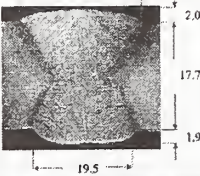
The sequence of the weld seam with the different weld speeds.
